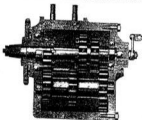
Indian Three Speed Gear; Main Shaft Above, Countershaft C Below. Clutch is Mounted on Taper Shaft at Left; Clutch Release Lever at Right.
